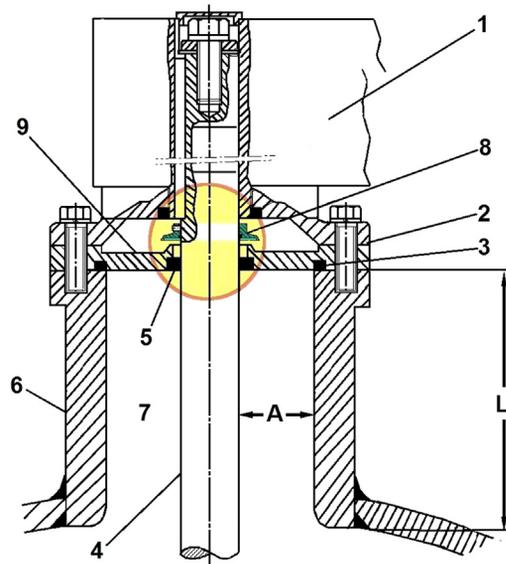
The top entering agitator with motor (1) is mounted to a vessel using a flanged or hygienic clamp connection (2), with hygienic O-rings or gaskets (3) to seal between the mating surfaces. A retained gasket having limited compression is more hygienic than an O-ring in the face for sealing the joint. The agitator shaft (4) passes through the mounting flange via a seal (5). The upstand (6) for the top mounting of the agitator should have limited length L because of the difficulty of cleaning the annular space (7) in-place. The annular space between the agitator shaft (4) and agitator nozzle (6) shall, for cleaning purposes, have the target maximum L/A ratio of 2:1. Agitator motors (1) should be equipped with permanently lubricated bearings. Where lubrication is required, the design and construction shall be such that lubrication cannot leak, drip, or be forced into the product zone. Self-lubricating agitator shaft (packing) seals (8) shall be provided with convenient means for adjustment to prevent leakage and to allow for complete drainage to the exterior. In that way, accumulations of foreign material in the event that leakage does occur can be avoided. Further, a drip protection plate (9) can be provided to prevent lubricant from entering the product zone (CFCRA, 1997; BISSC, 2003; ASME, 2009).
